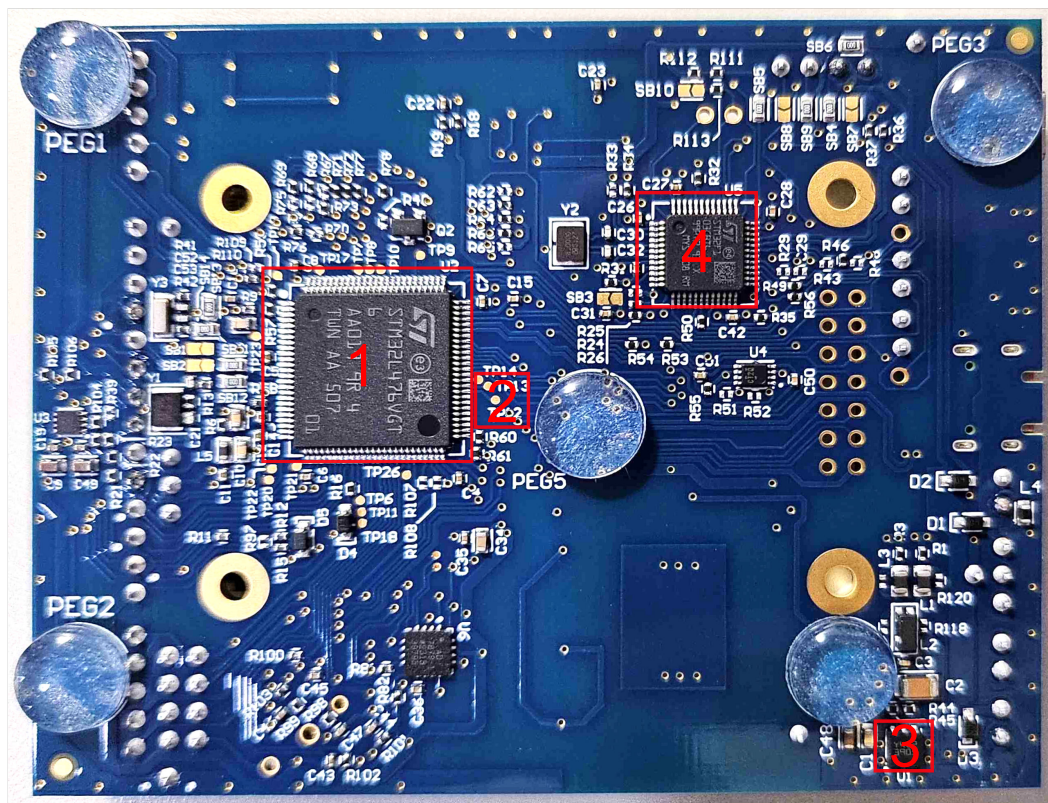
STEVAL-M25B1 main board layout (bottom view)
